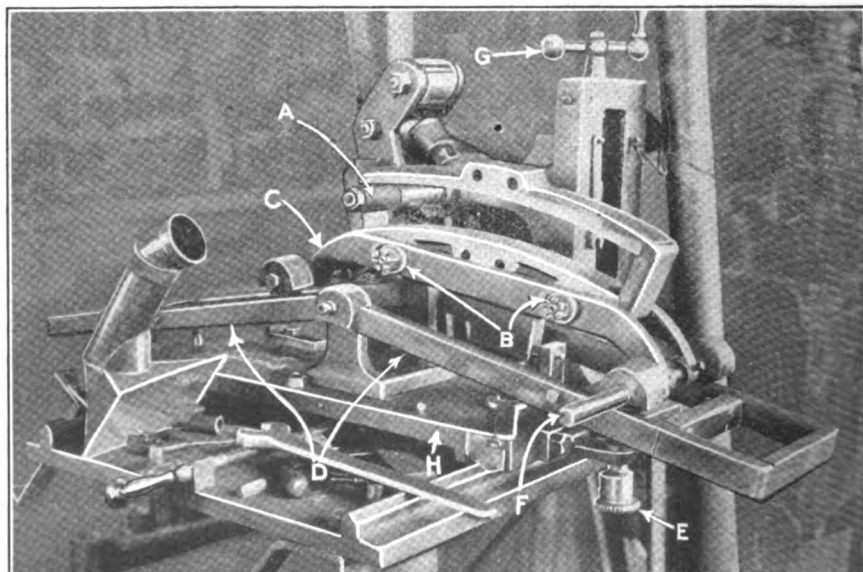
"HOME-MADE" LINK GRINDING MACHINE
